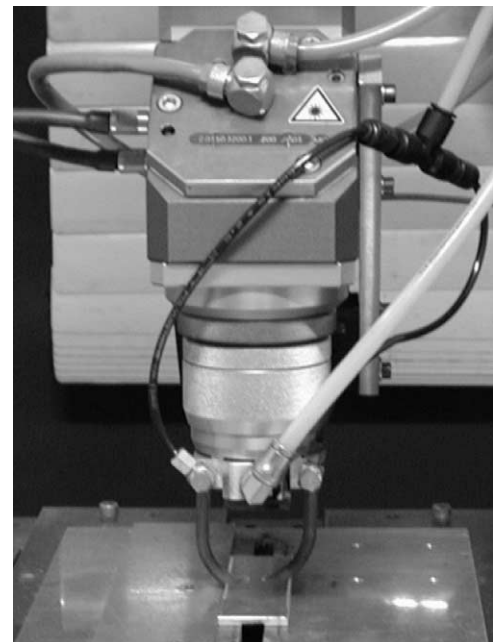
Welding head with a parabolic focusing mirror and a two-pipe nozzle.
